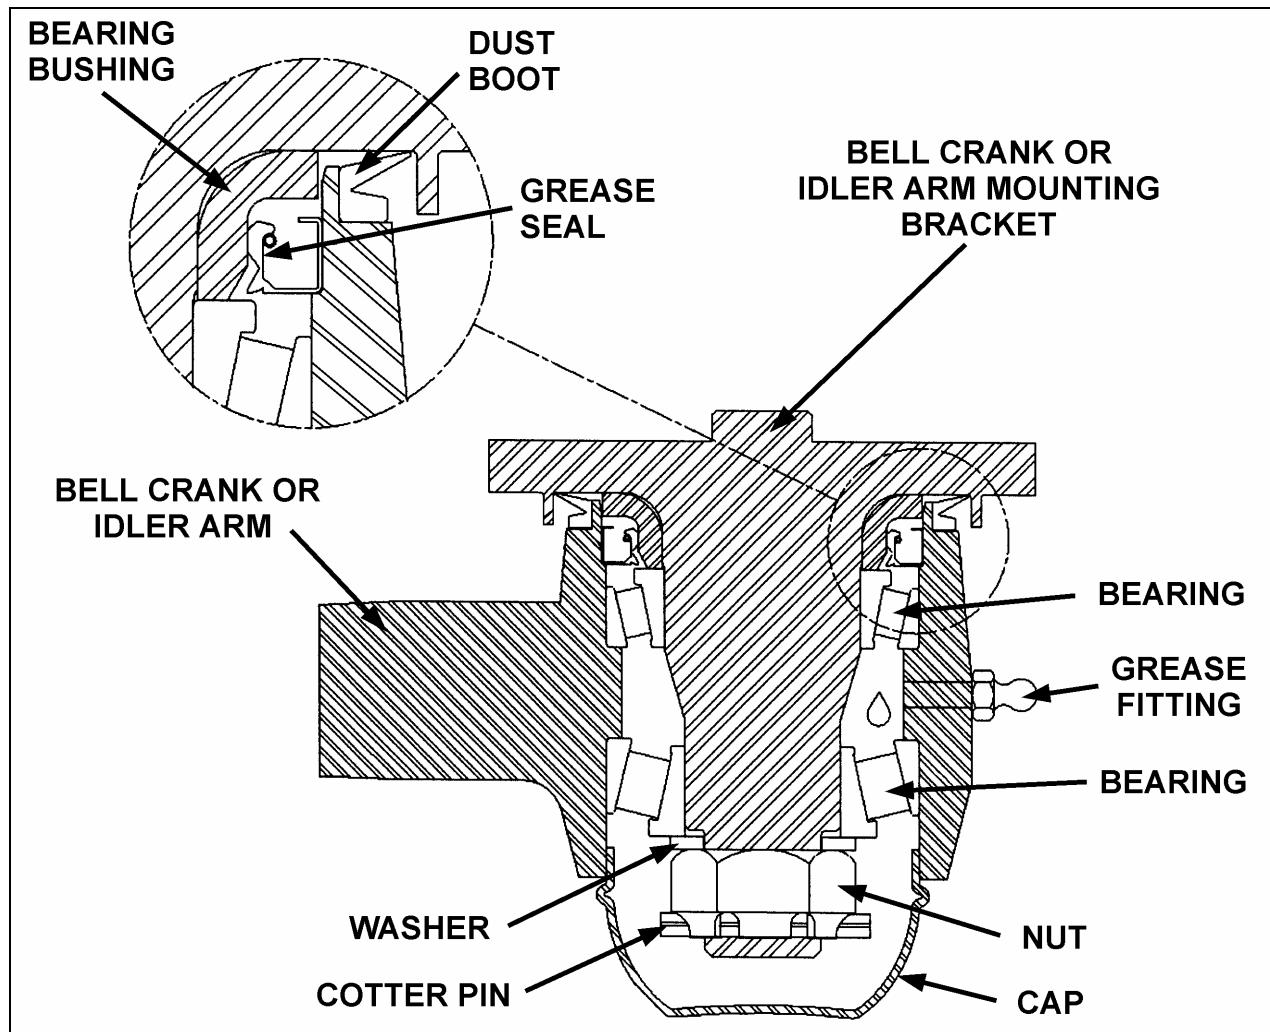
BELL CRANK AND IDLER ARM BALL JOINT
